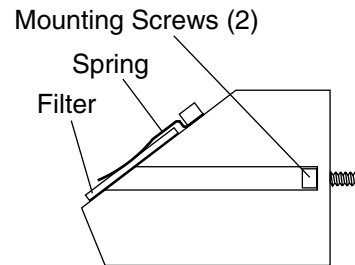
Visible Light Filter, Side View (Attaches to Signal Window).
